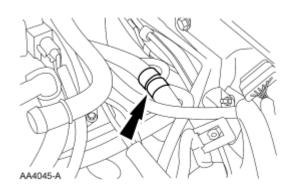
Fuel Charging Wiring In Crash Bracket Courtesy of FORD MOTOR CO.
